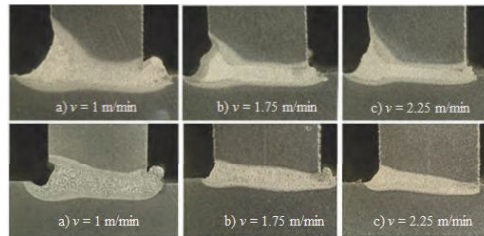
Welding of 8 mm AH36 with HLAW (up) and autogeneous laser welding (down).
